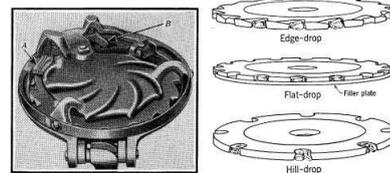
Left: Hopper bottom for typical horizontal-plate corn planter. Note the spring-loaded (yielding) cutoff A, and the spring-loaded knockout pawl B. Right: Three types of edge-cell plates used interchangeably in this hopper bottom. (International Harvester Co.)
